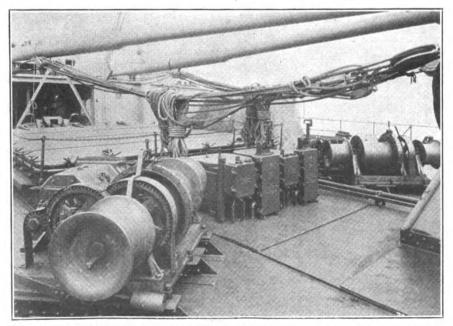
CARGO WINCHES WITH SOLENOID SHOE BRAKES—CONTROLLERS IN CENTER M. S. GULFPRIDE
